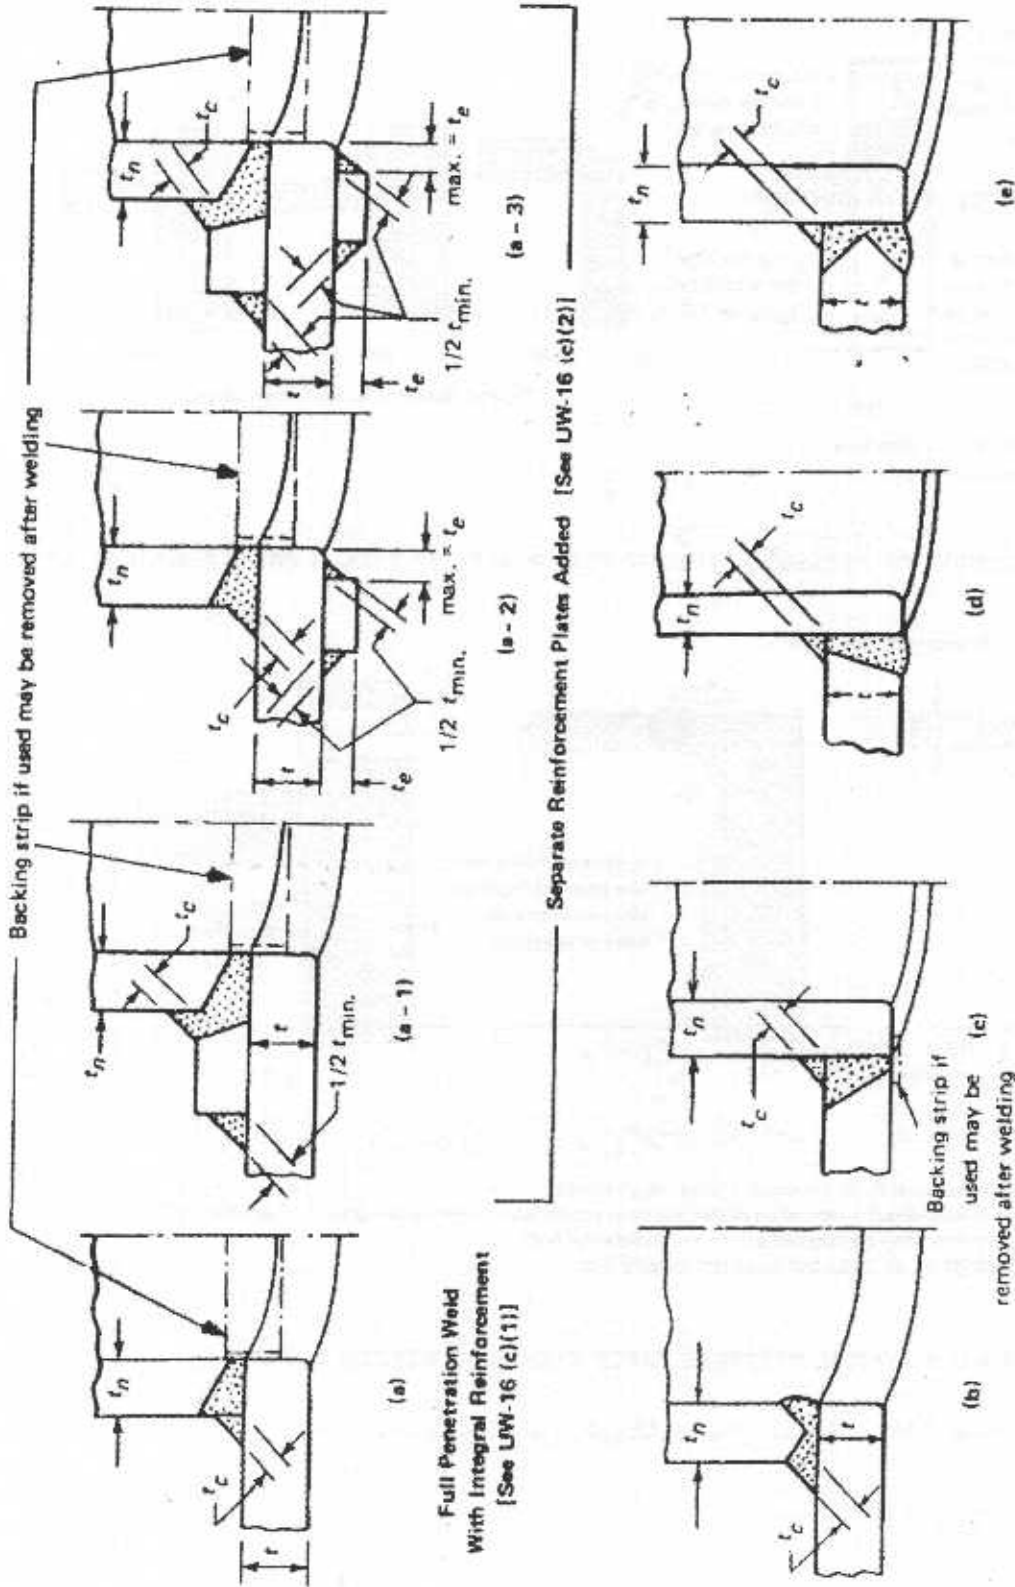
SOME ACCEPTABLE TYPES OF WELDED NOZZLES AND OTHER CONNECTIONS TO SHELLS, HEADS, ETC.
